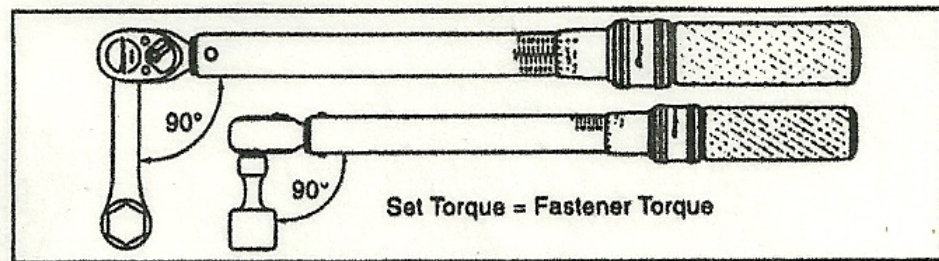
Using wobble extensions/universals with torque wrenches.
